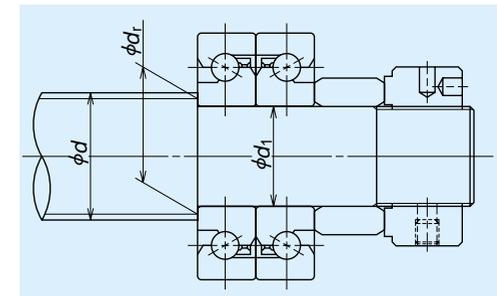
Support bearing and end face (shoulder) for installation
